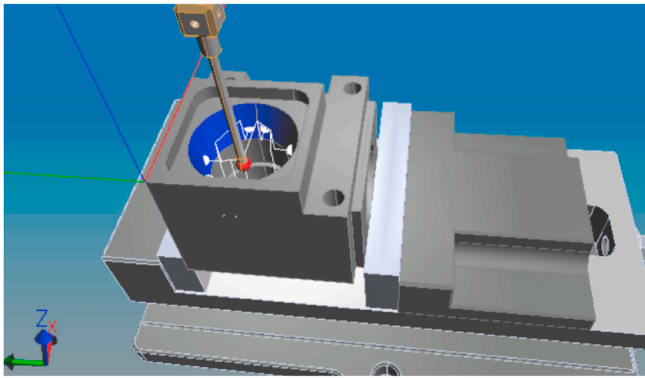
A STEP-NC Machine simulation view (inspection of cone).
